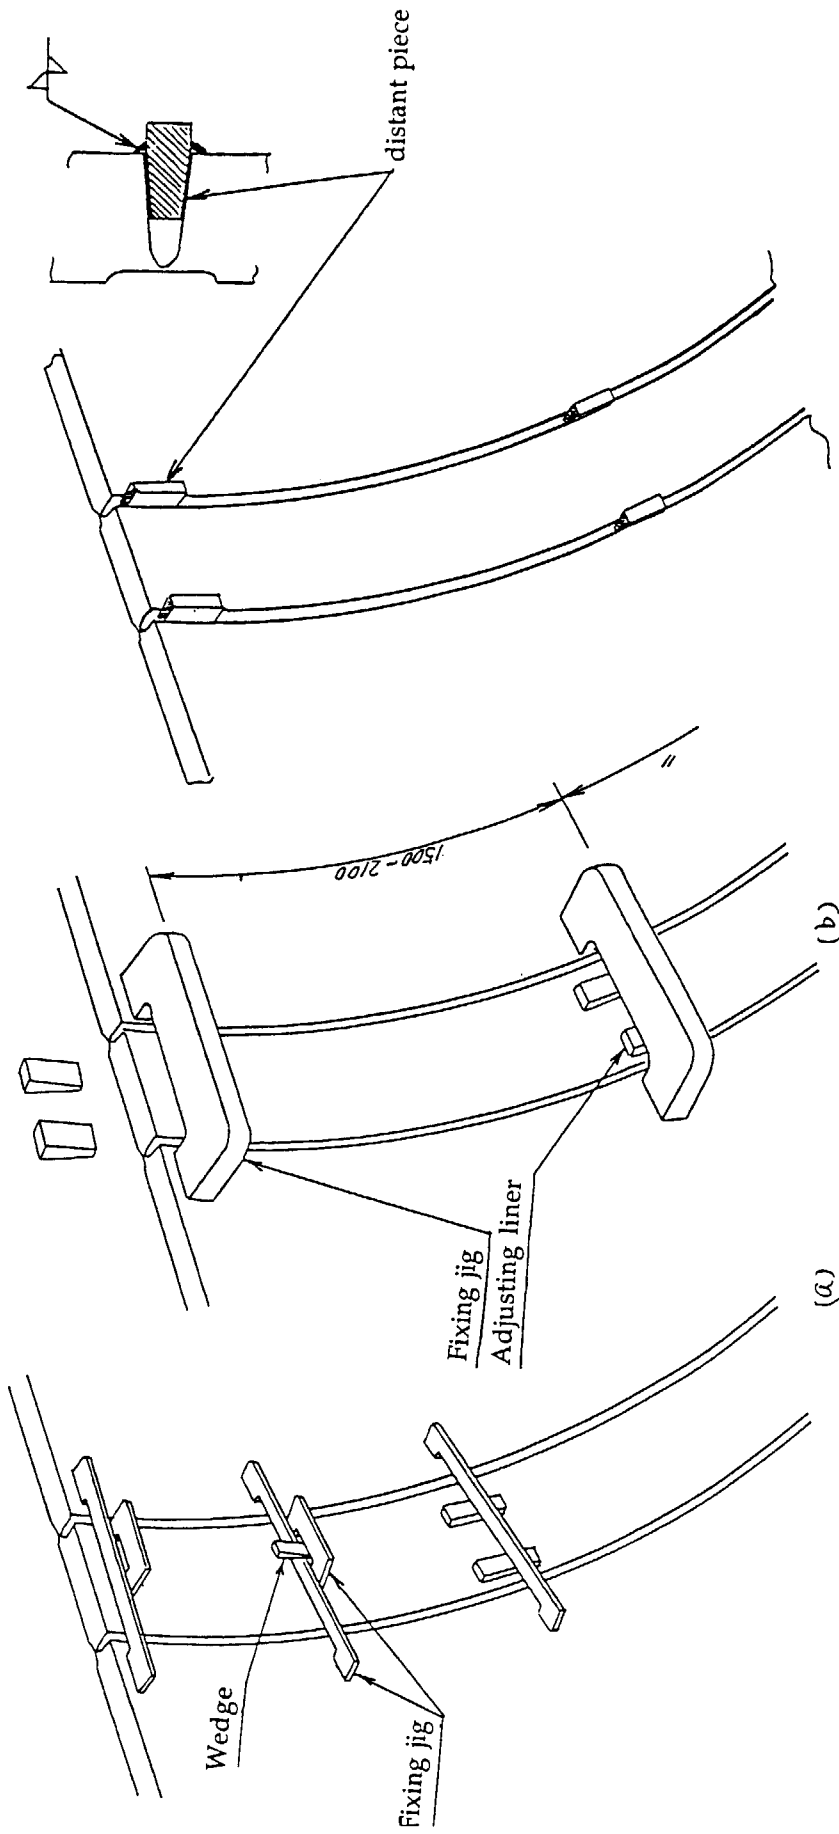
Back plate fixing tool "Stay" for welding deformation prevention.
